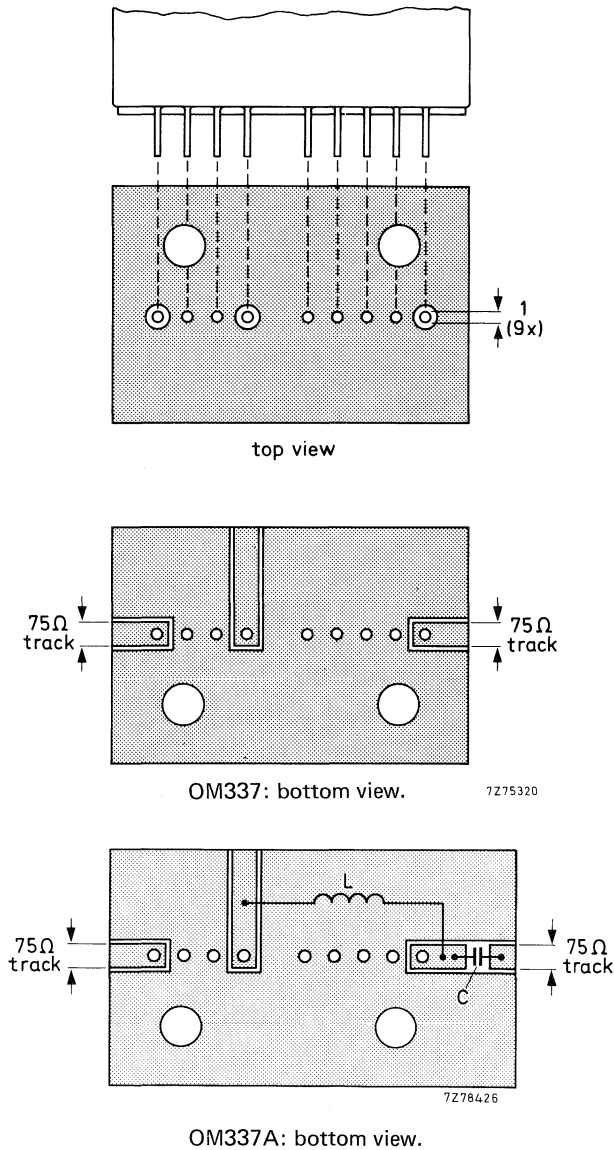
Printed-circuit board holes and tracks for the OM337 and OM337A.
